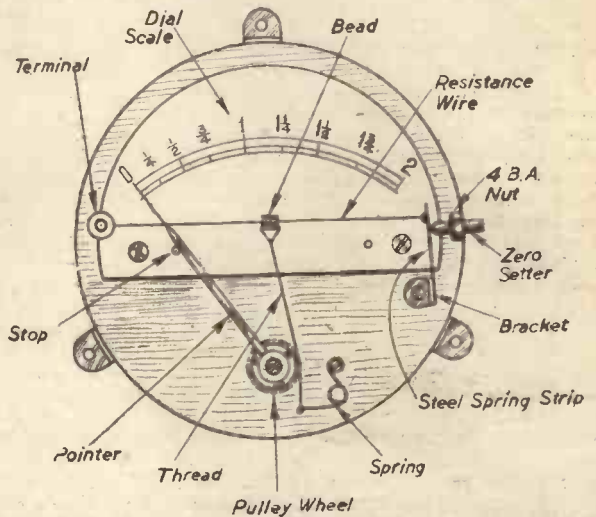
The constructional details of the meter, showing the method of adjusting tension of wire, and pointer operation.
